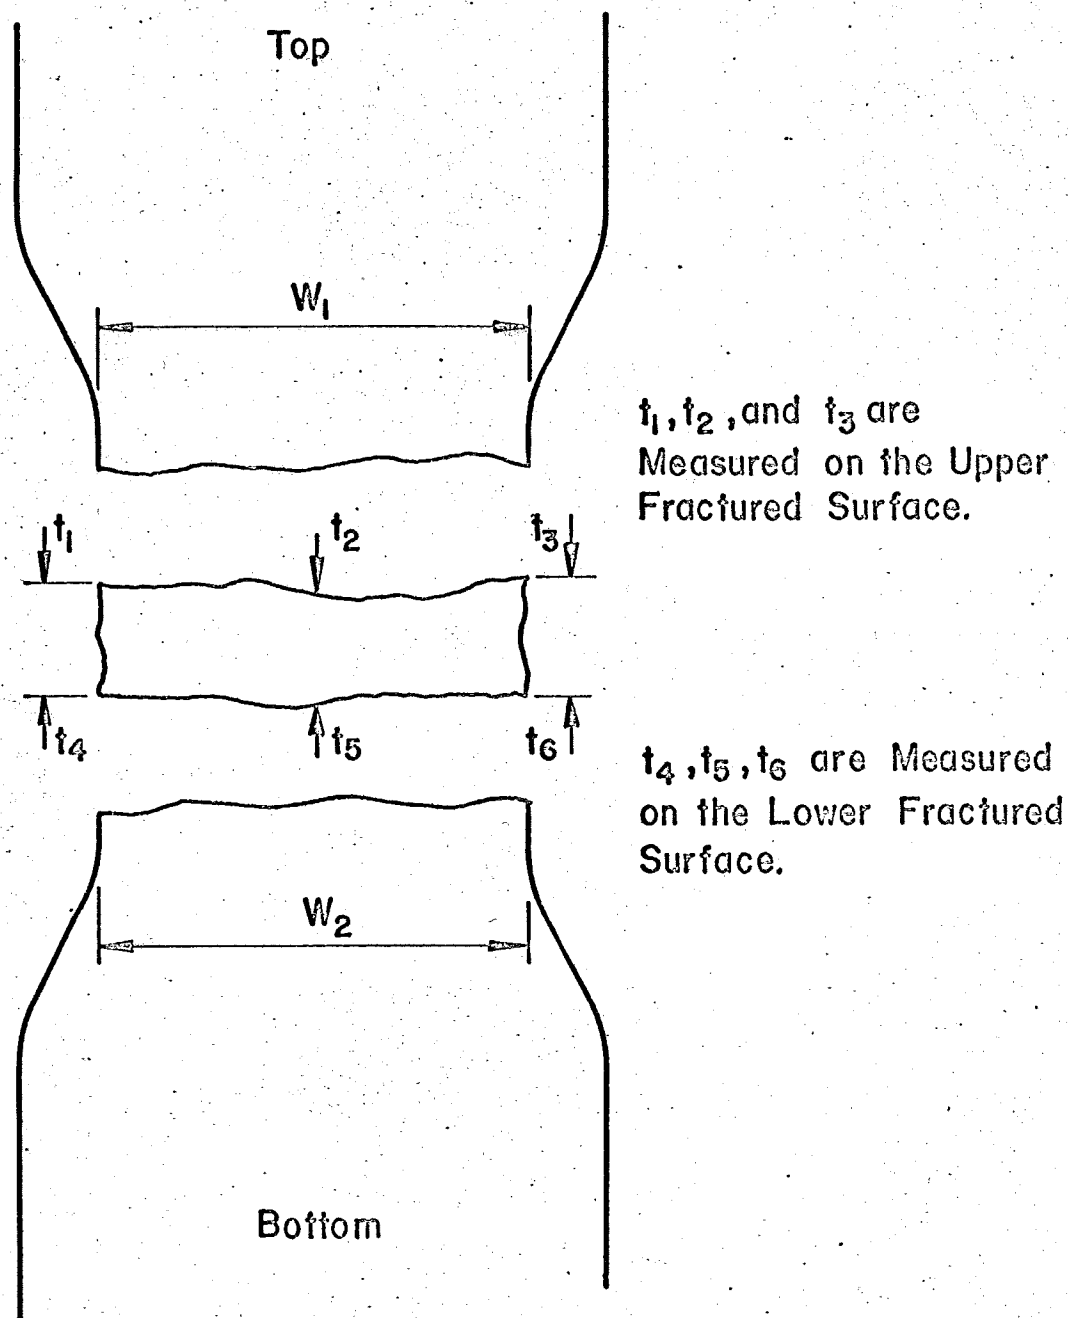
MEASUREMENTS ON THE FRACTURED SPECIMEN
